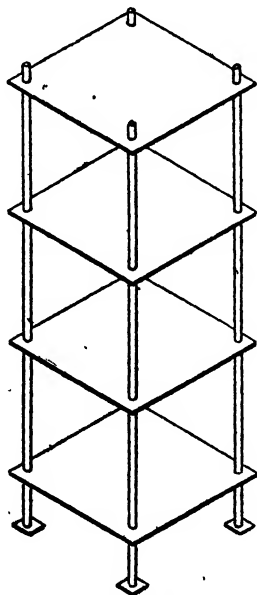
USEFUL STAND FOR WELDING SHOP
